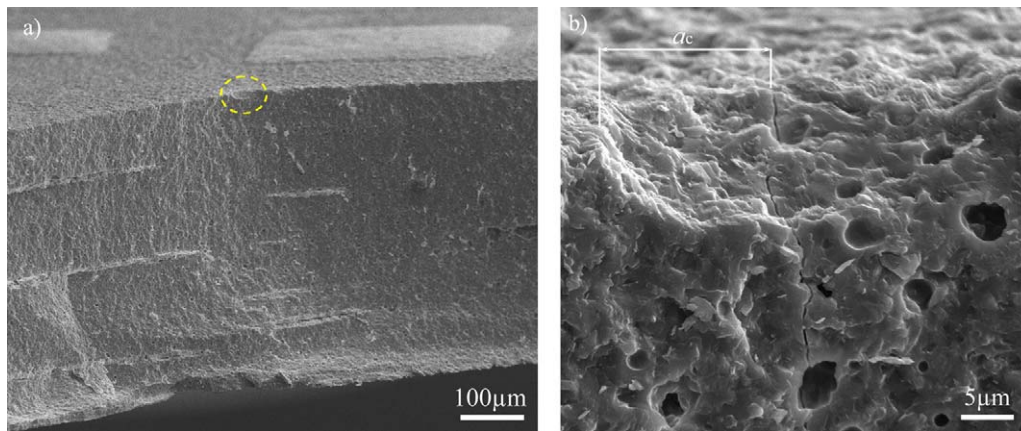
a) SEM micrograph of the fracture surface of a specimen tested with the upper side under tension. b) Detail of a crack initiated at the centre of the origin and running normal to the main crack causing the failure during biaxial bending.
